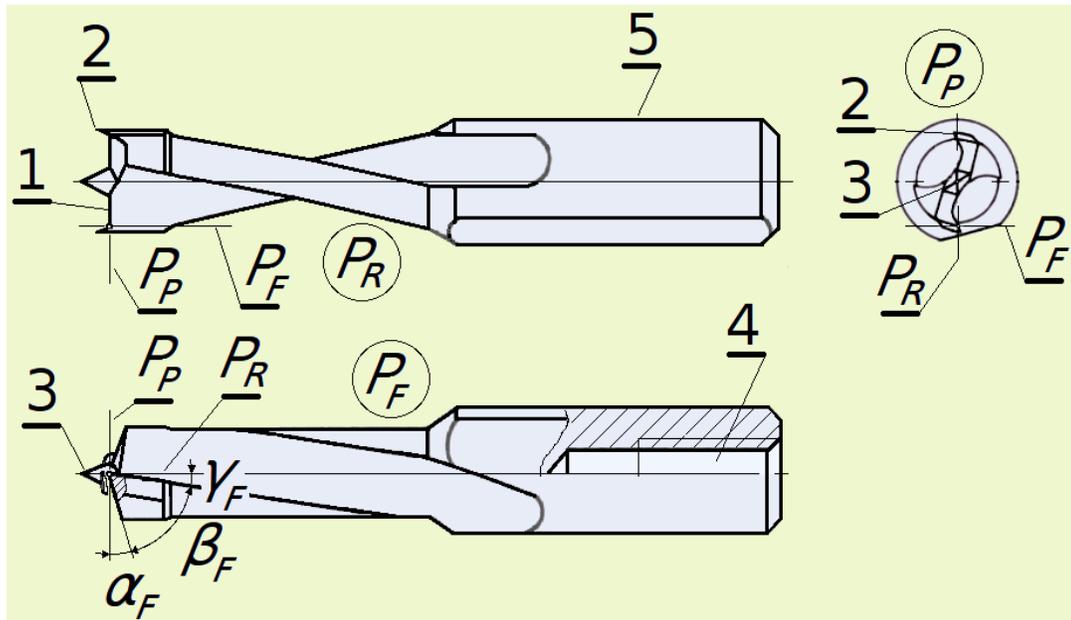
Stereometrical parameters of the drill; 1 - main (face) cutting edge, 2 - side edge, 3 - centering peak, 4 - hole notched for fixing screw, 5 - cylindrical grip
